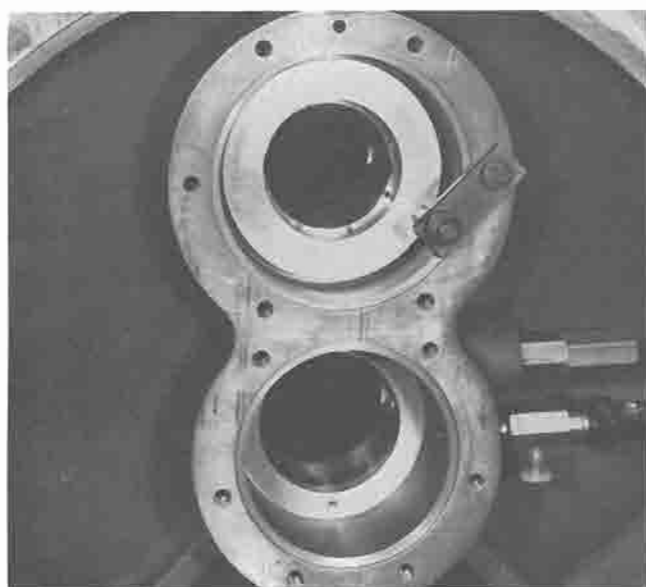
HOLDING HIGH-SPEED THRUST BEARING IN POSITION
